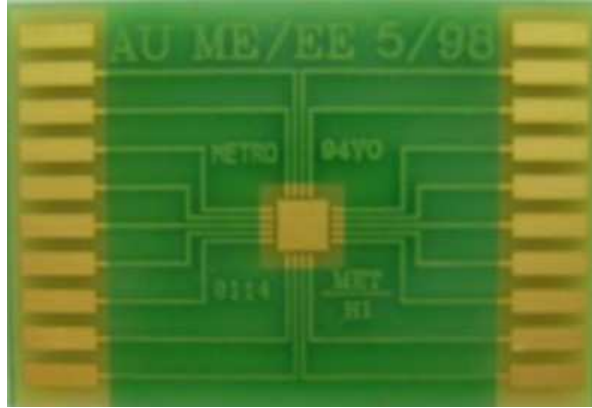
Specially designed PCB for TCR and hydrostatic tests
